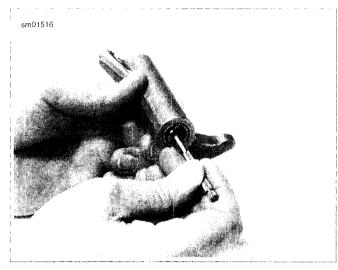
Measuring Rocker Arm Bushing Inner Diameter
